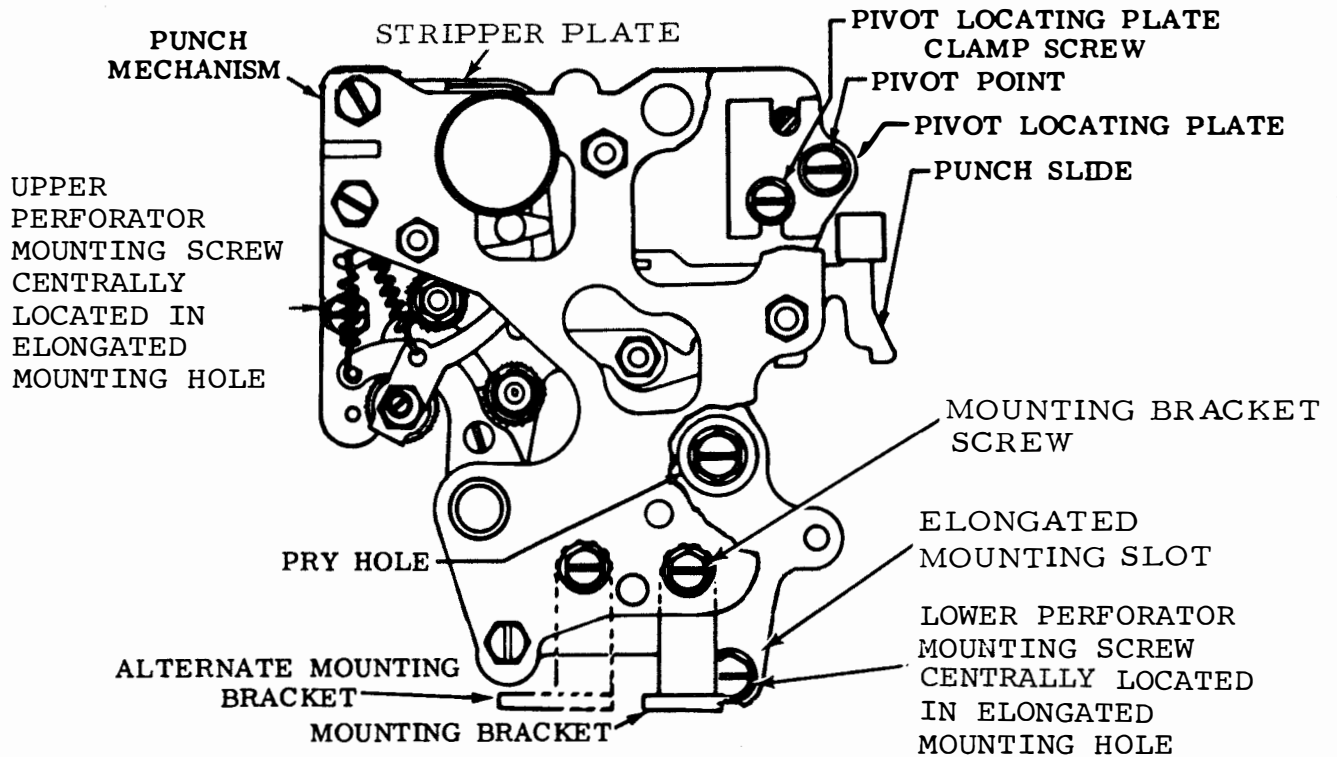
Punch Mounting Plate (Preliminary), Front View
